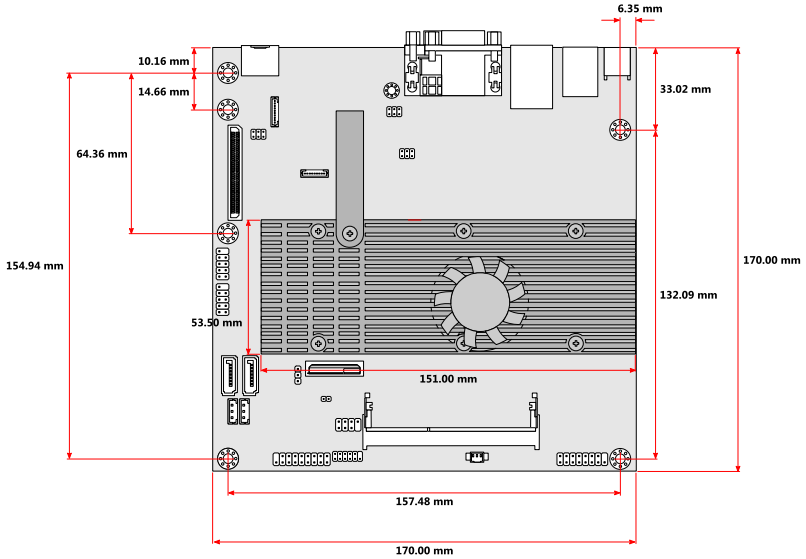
Dimensions of the VB8004 mainboard (VB8004-16 SKU)
